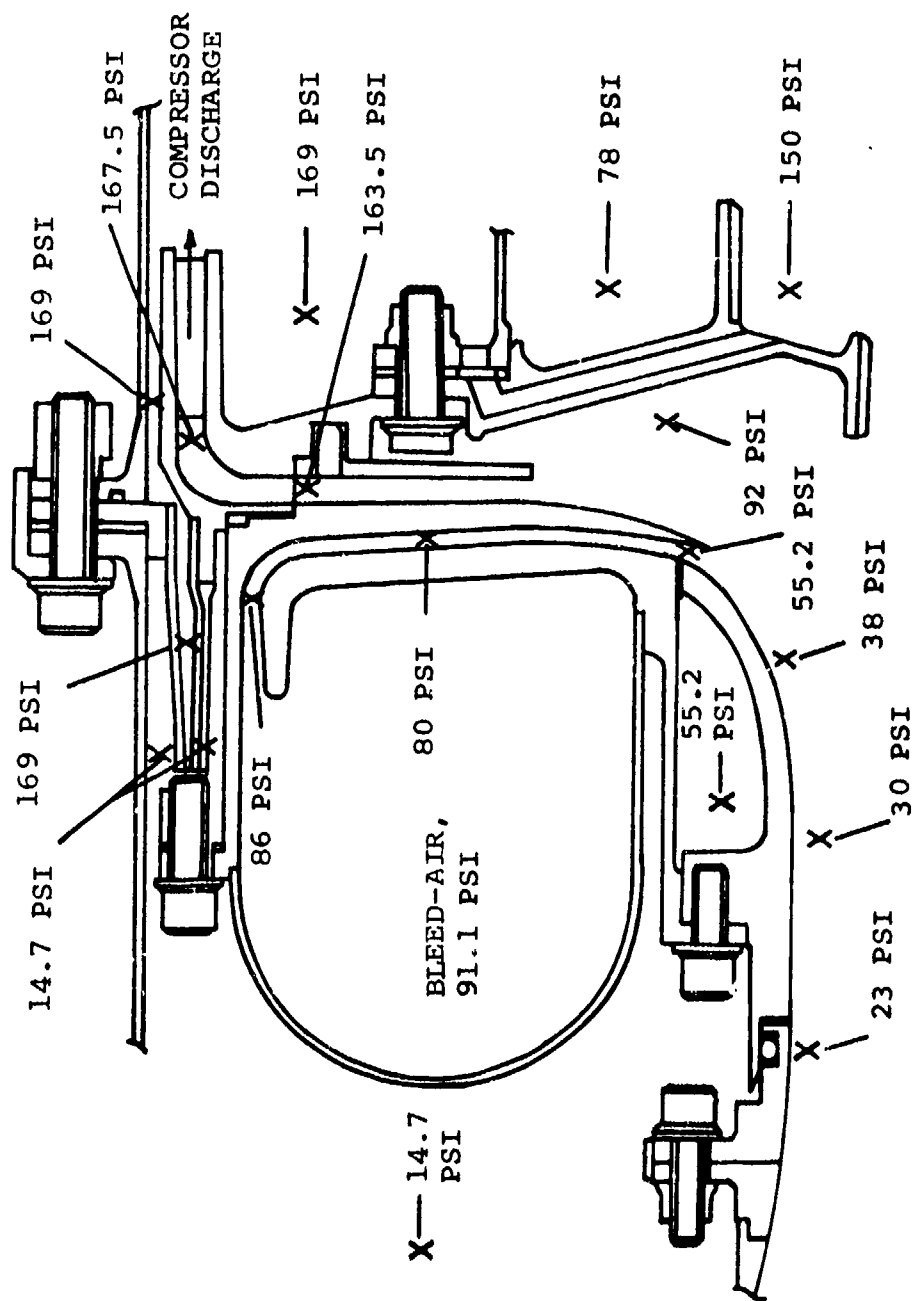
Bleed Plenum, Flow Splitter, and Shroud Assembly
